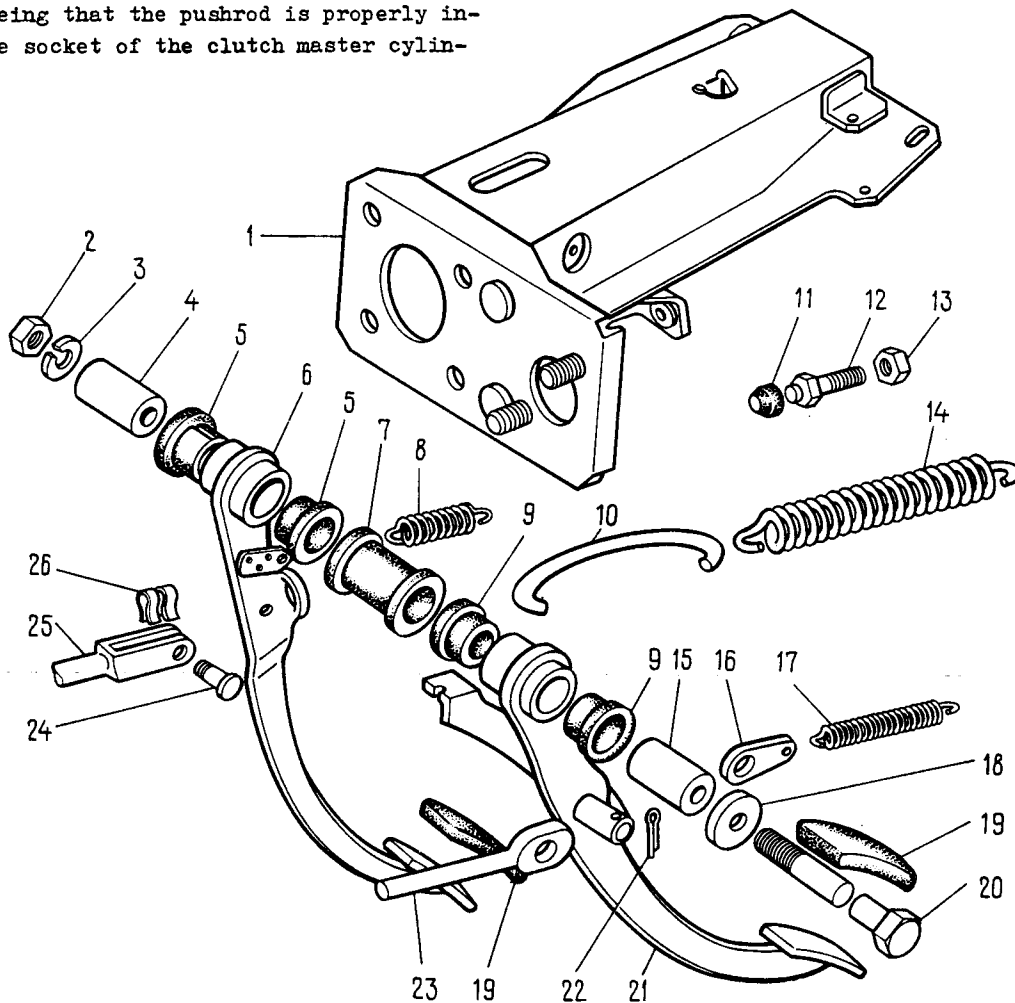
Parts of Clutch and Brake Pedals Bracket:
